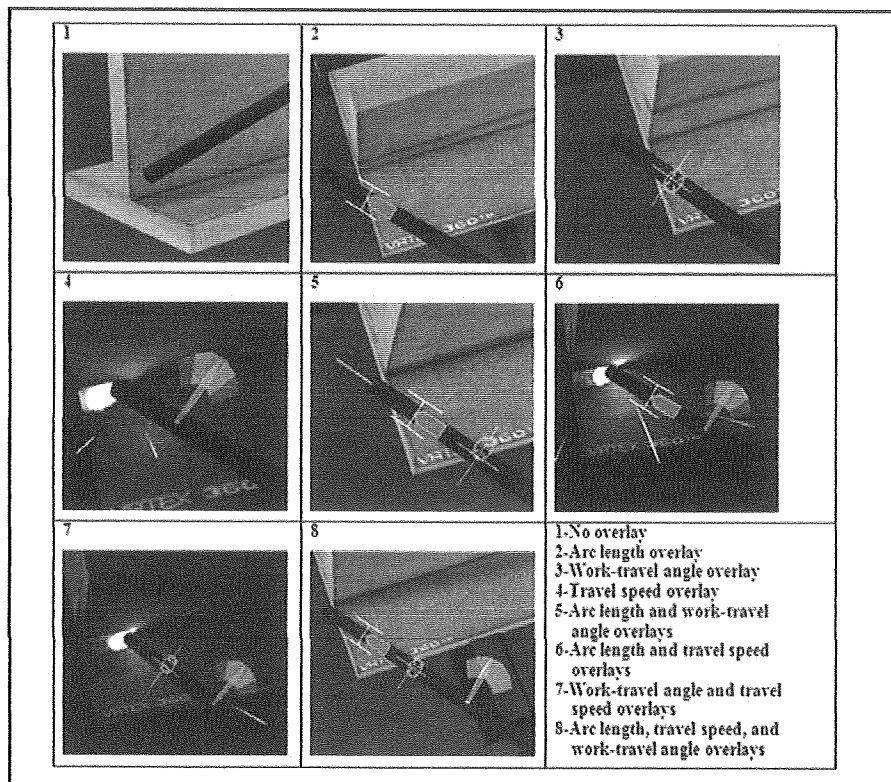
Images of possible overlay strategies (shown for a 2F weld).
